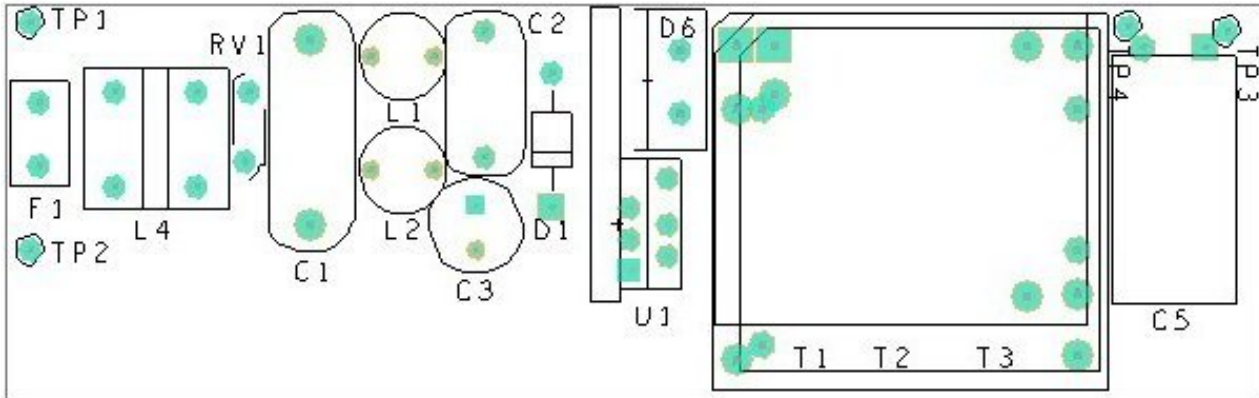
Printed Circuit Layout, Top, 3.98" (101.2 mm) x 1.26" (32 mm).
